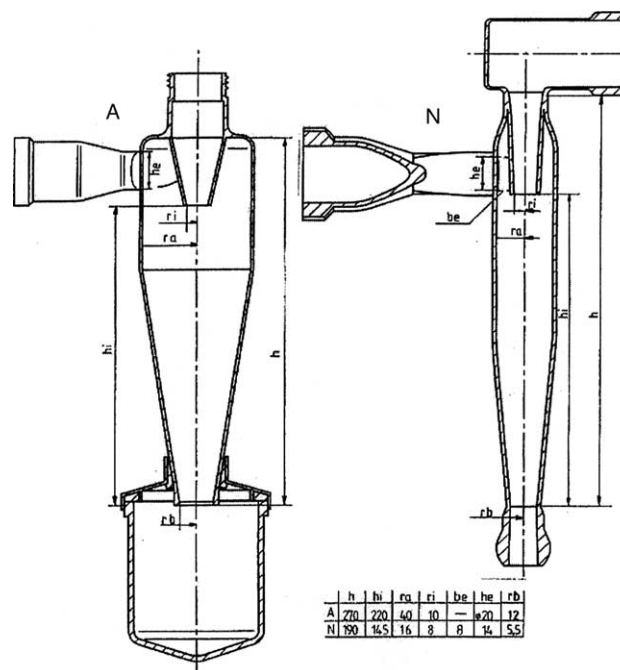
Design and relevant dimensions (mm) of the standard Büchi cyclone (A) and the improved cyclone (N).
